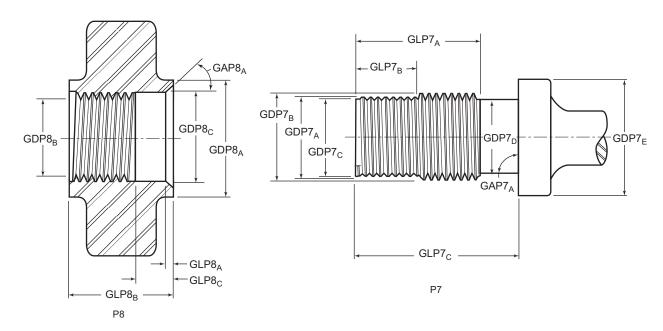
Go Pin-thread Gauges (For Gauging Sucker Rod Pin Connections)
